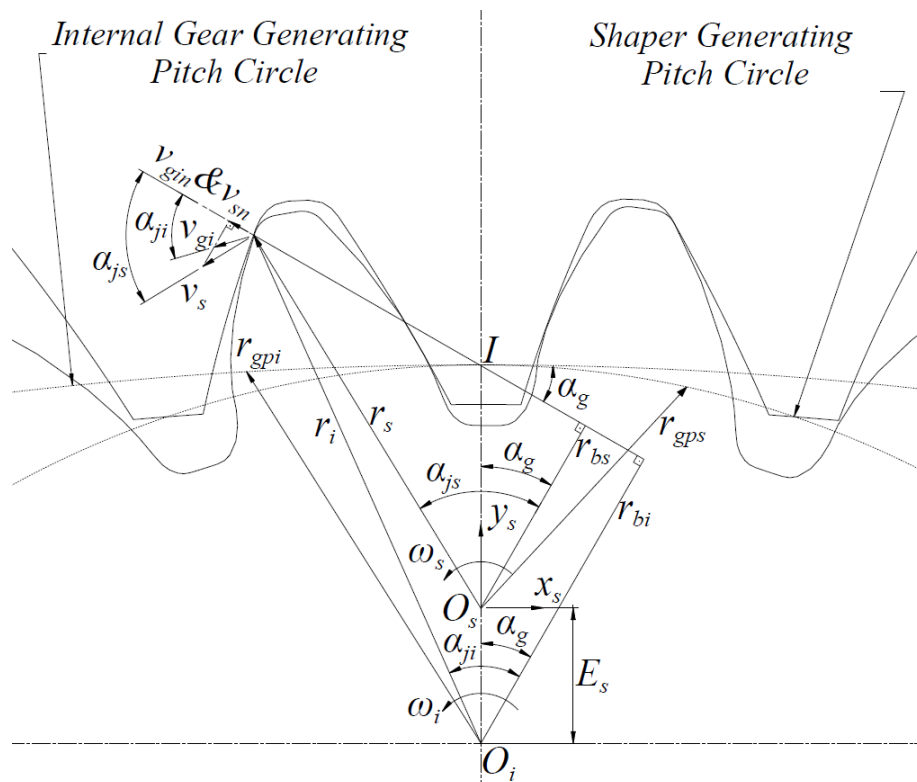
Generation of internal gear involute flank surface by the involute surface of the shaper cutter
